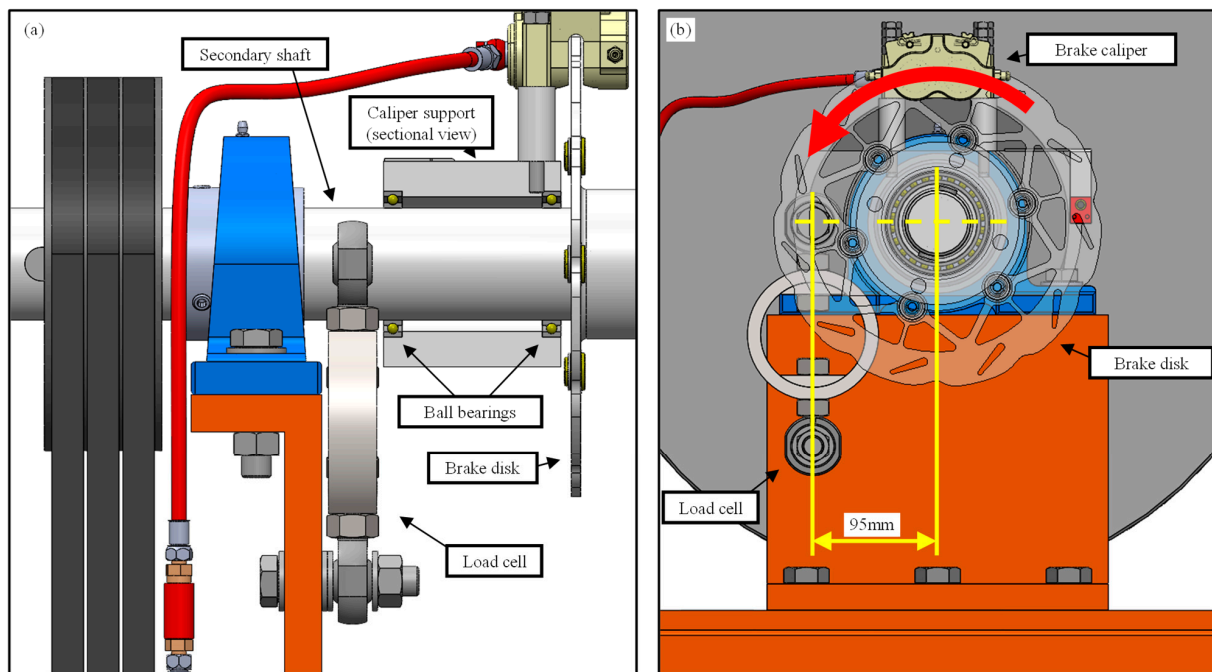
Working principle of the brake torque sensor: (a) side view of the bench with highlighted offset between the load cell and the axis of the secondary shaft, and (b) sectional view of the caliper support showing the ball bearing allowing its rotation.
